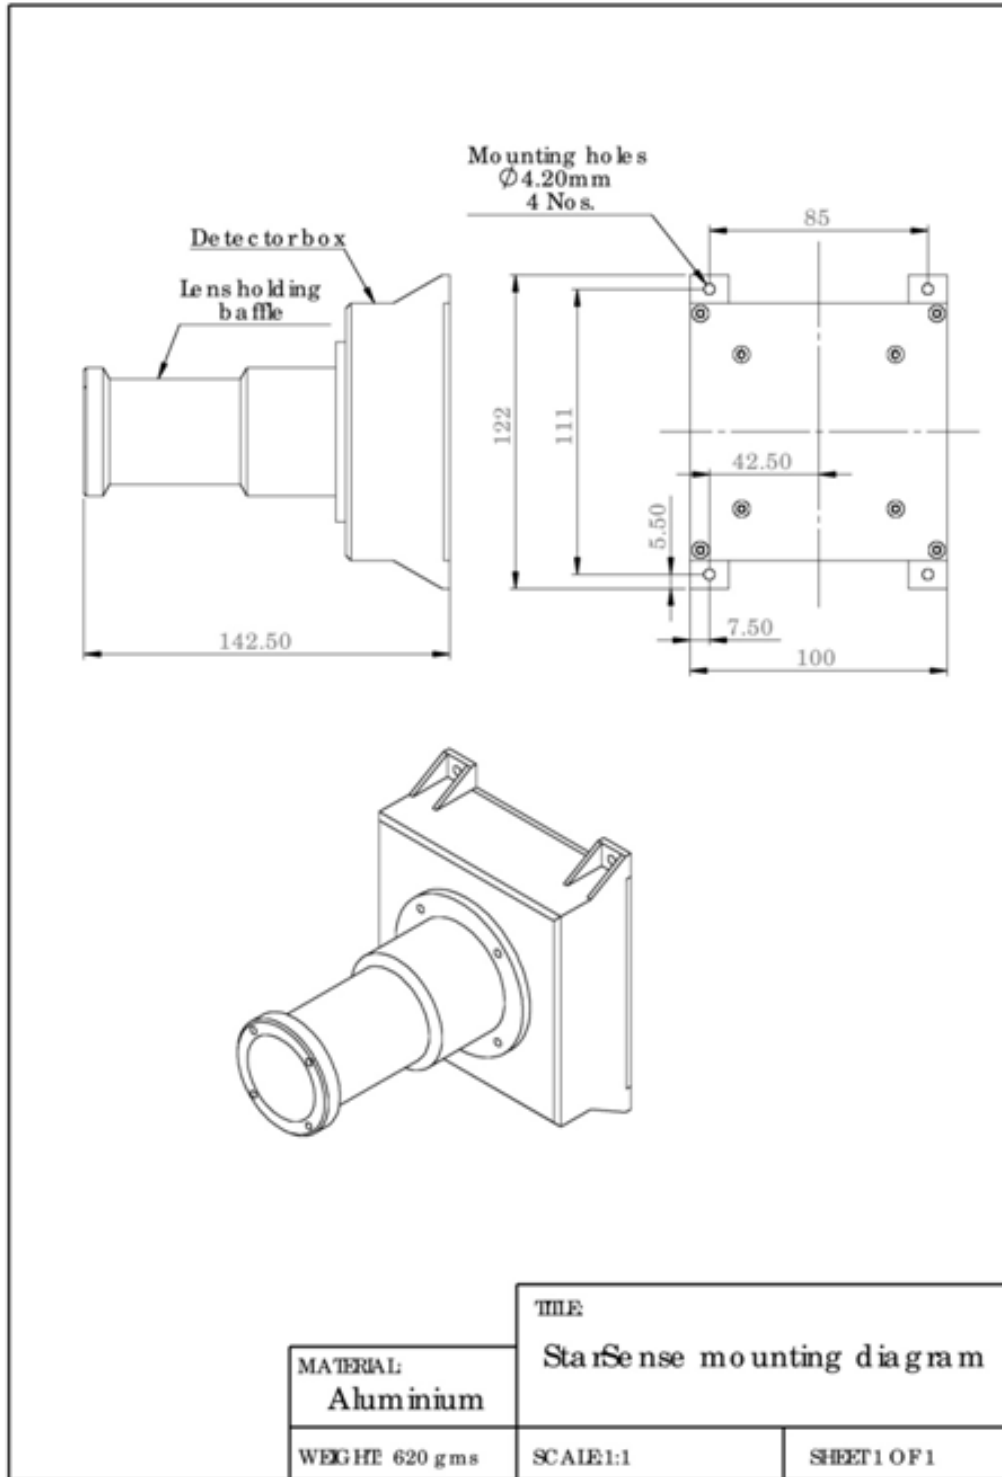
Mechanical interface for mounting *StarSense*. The positions of the holes and their dimensions required to mount the sensor to a pointing system or test equipment. This mounting interface was necessary in designing various test fixtures.
